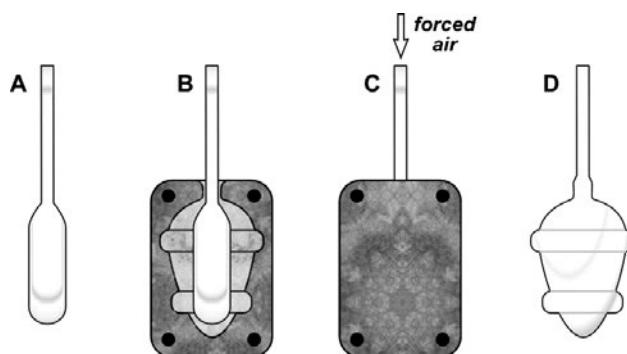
Blow-molding with a two-piece mold: (A) hollow glass blank; (B) glass blank inserted into mold; (C) mold fastened together and softened glass blown to fill mold; (D) mold disassembled and hollow vessel isolated [reprinted with permission from reference 2. Copyright 2015, American Chemical Society].
